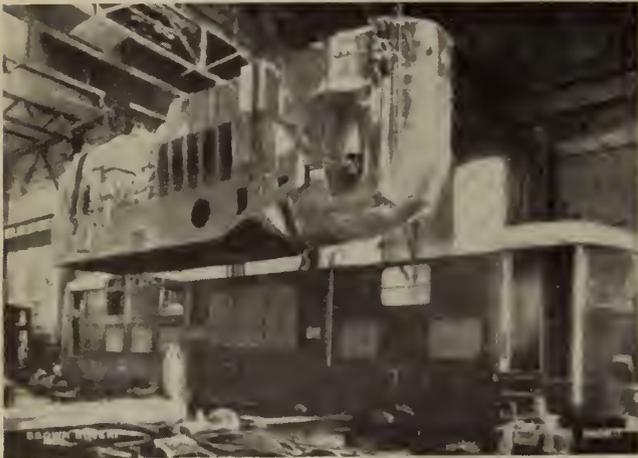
Fitting of the complete gas-turbine in the locomotive.
